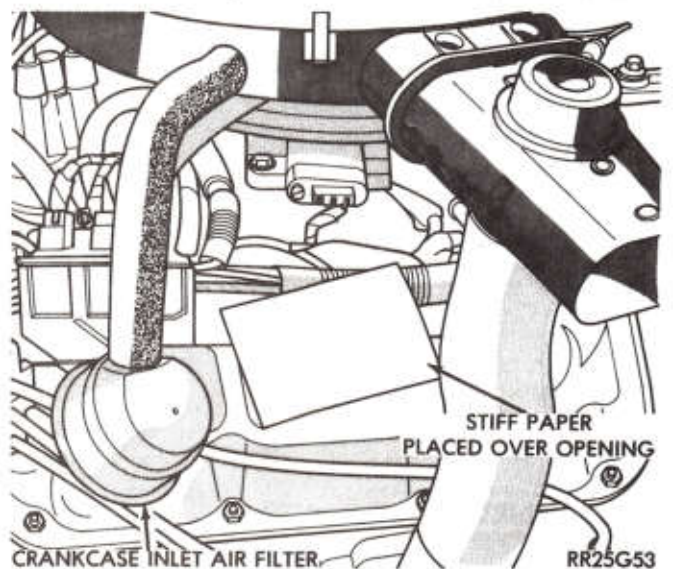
Check Vacuum at Crankcase Inlet Air Filter Opening
